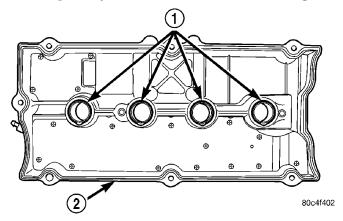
Cylinder Head Cover Gasket and Spark Plug Well Seals
